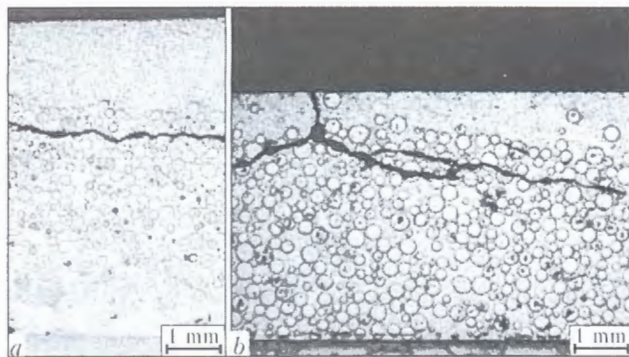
Crack location in the metal layer at incomplete filling with tungsten carbide deposited using a mixture (a), and separate powder feed (b)
